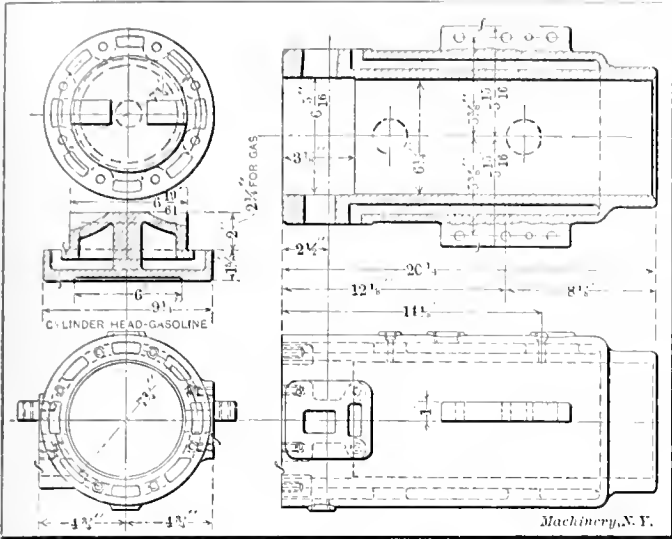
Detail of a 6 1/4 by 8 Gas Engine Cylinder
